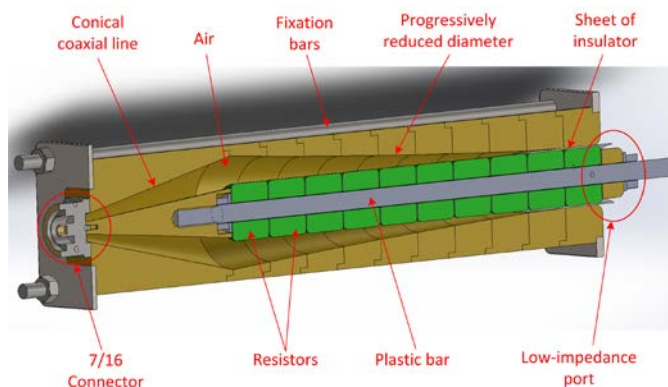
Cross-section view of the adapter, from the CAD drawings.
